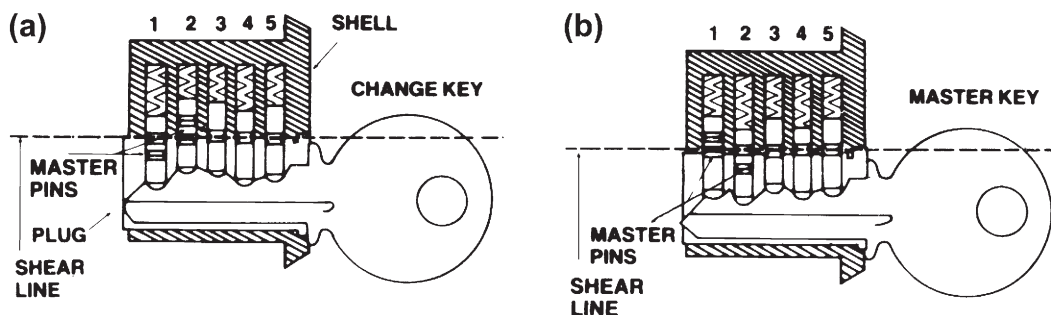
Master-keyed pin tumbler cylinder mechanism: (a) This is a simple master-keyed system using master pins in the first and second tumbler positions. When the change key is inserted, note that the top of the first master pin aligns with the top of the cylinder plug. The remaining positions show the key pins aligned with the top of the plug. This arrangement permits the plug to turn. (b) With the master key inserted, the first position aligns the top of the key pin with the cylinder plug. The master pin is pushed farther up the pin cylinder. The second position shows the master pin aligning at the top of the plug. The master pin has dropped farther down the pin hole in the plug. The remaining three positions are unchanged. This arrangement also allows the plug to rotate.
